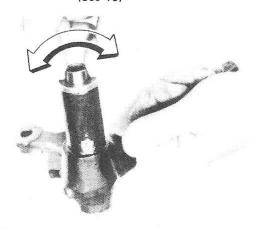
Check the steering knuckle collar and bushings for wear by moving the collar as shown and feeling for play (Sec 11)
